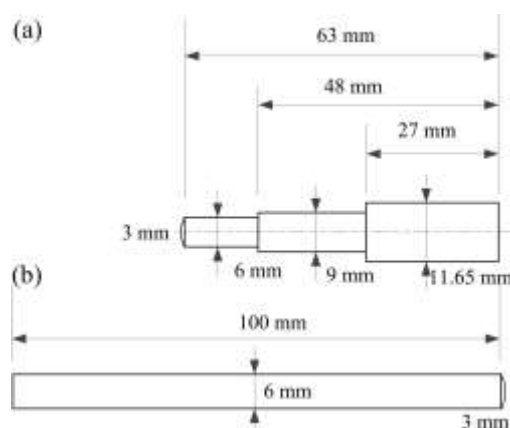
Geometry of the electrodes: (a) the upper electrode; (b) the lower electrode.
